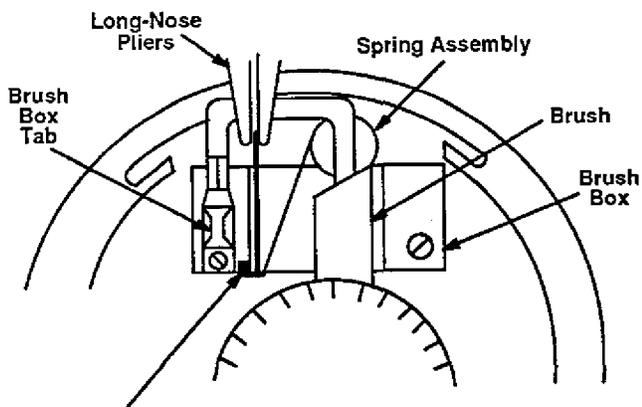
View Of Spring Assembly And Brush When Brush Cap Is Opened
